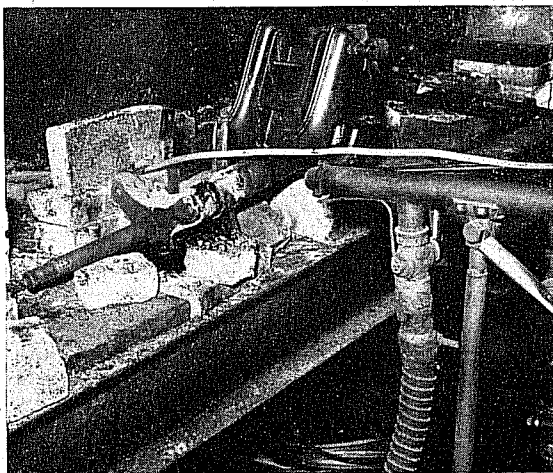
(above).—Machining steering head recess to take bearing cups. Location is from engine mounting bracket
